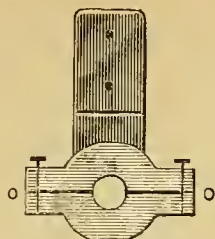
SIDE VIEW OF ATTACHMENT TO CRANK.
